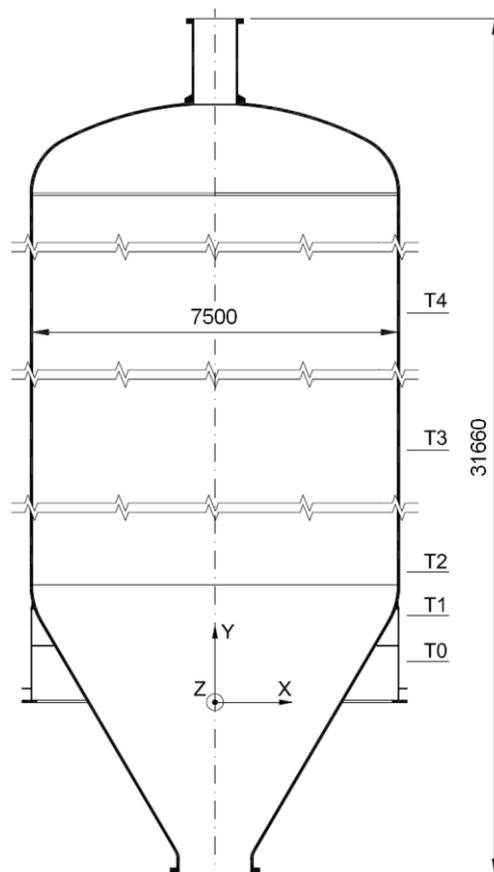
Coke drum main dimensions (mm) and points of skin temperature measurements.
